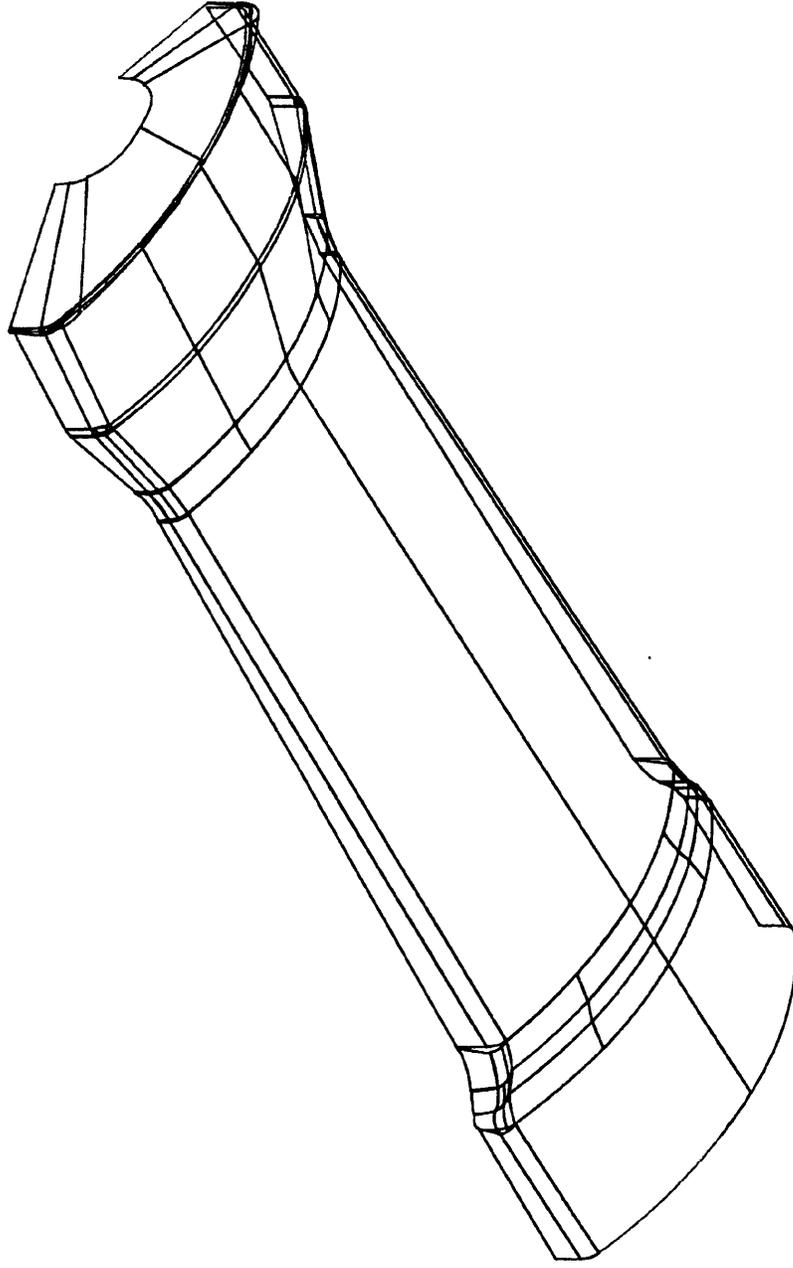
The offset surfaces necessary for the manufacture of one-half of the mould required to produce the bottle shown in Figure 5.6
